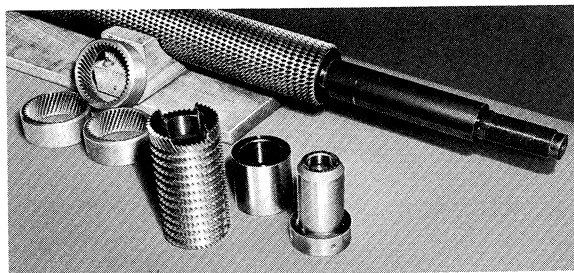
Full-Form finishing broach showing roughing section, finishing shell, tailpiece and broached gears.
